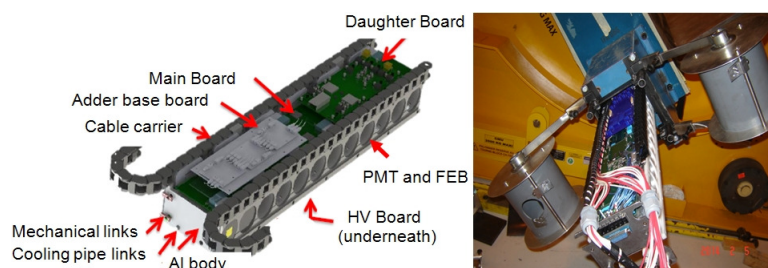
Mini-drawer design (left), Demonstrator and manipulation tooling (right).
